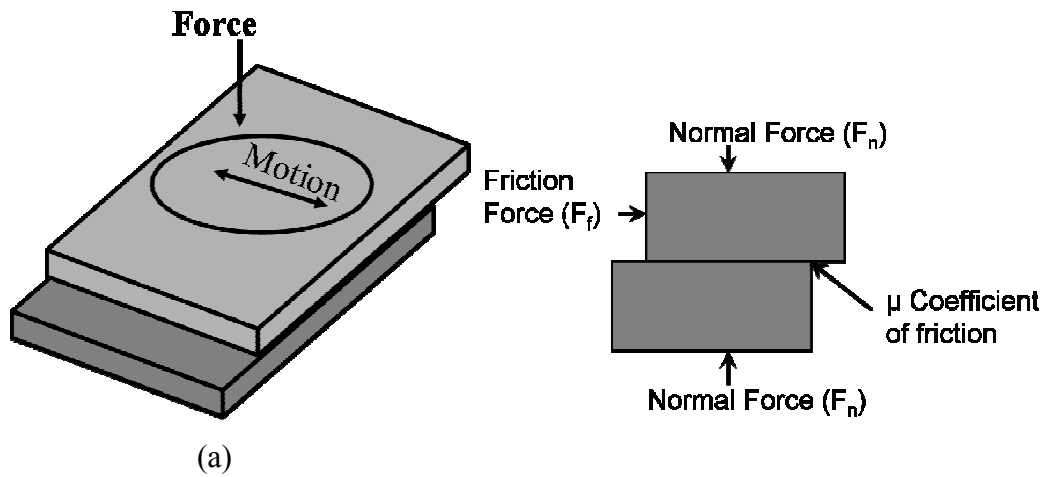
(a) Cartoon of welding showing LOCAL motion (b) small element removed from center of (a)
